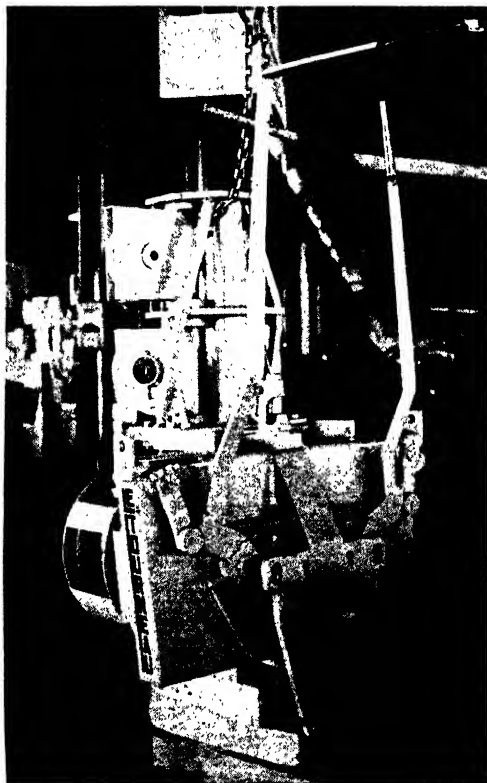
By the welds that fasten the cast neck structure (through which the spring passes) to the fabricated main case of this unit, the serviceman can tell that the neck is a weldable steel casting. (Courtesy of R. G. LeTourneau, Inc.)
